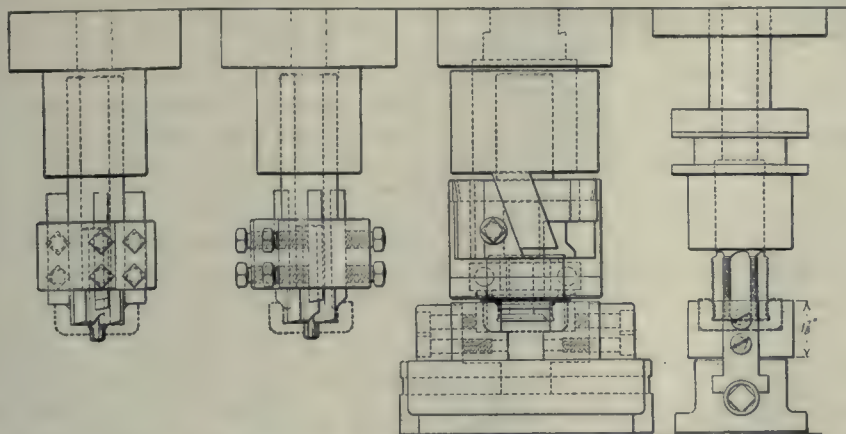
TOOL LAYOUT FOR MACHINING SHRAPNEL SOCKETS—FIRST OPERATION.
